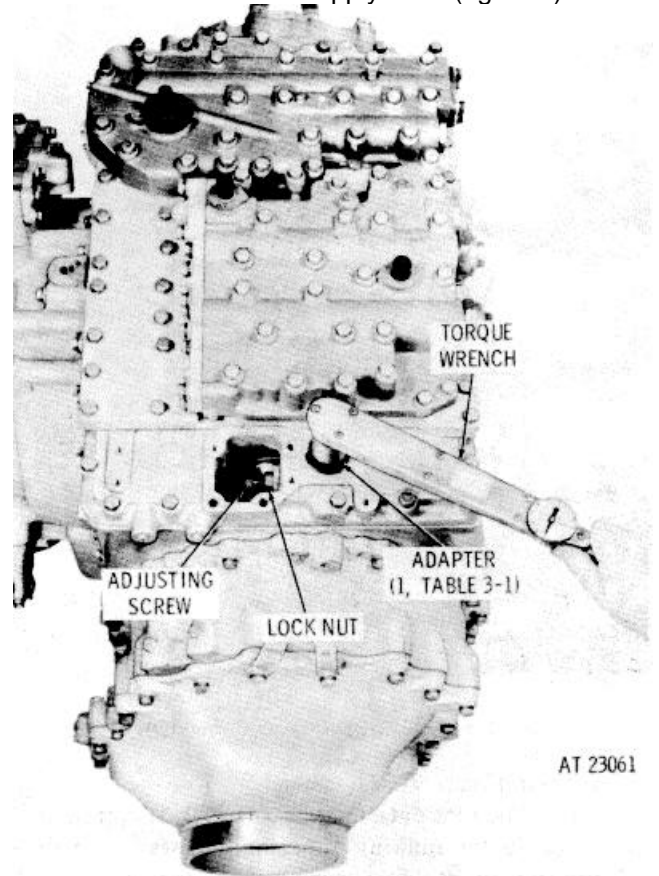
Checking rotation of brake apply shaft during adjustment of brake.
